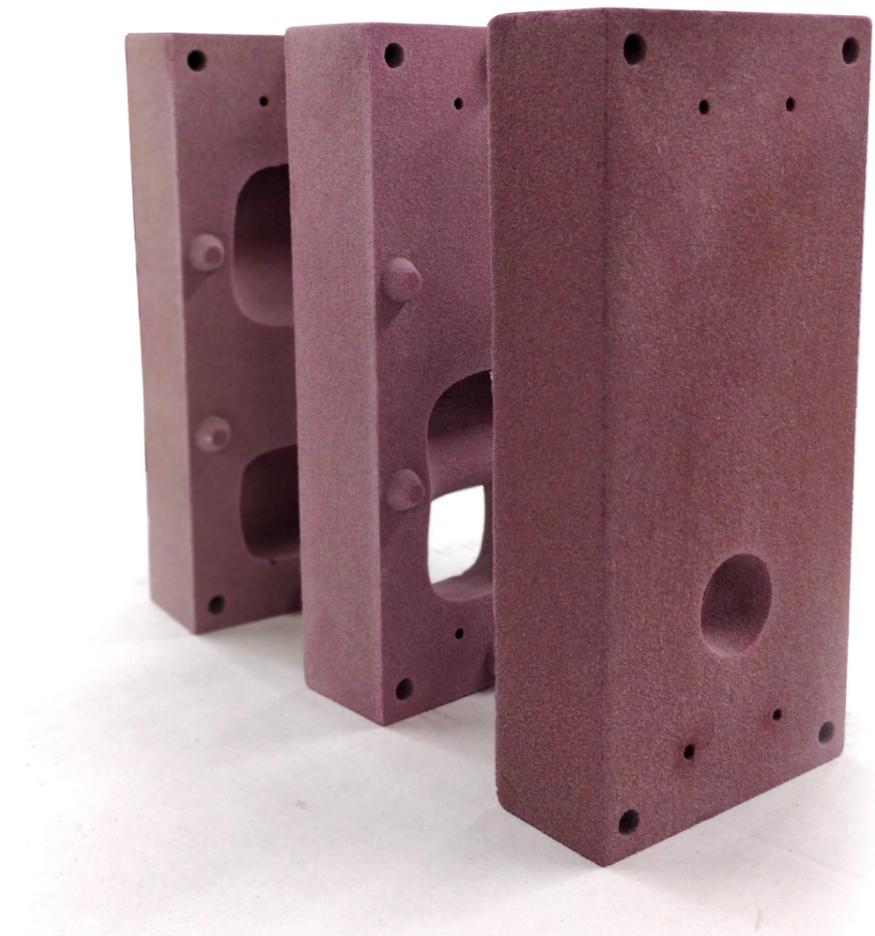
o: 3D printed mould at 1:3 scale for prototyping
